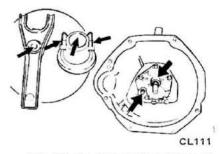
Lubricating points of withdrawal lever and front cover
